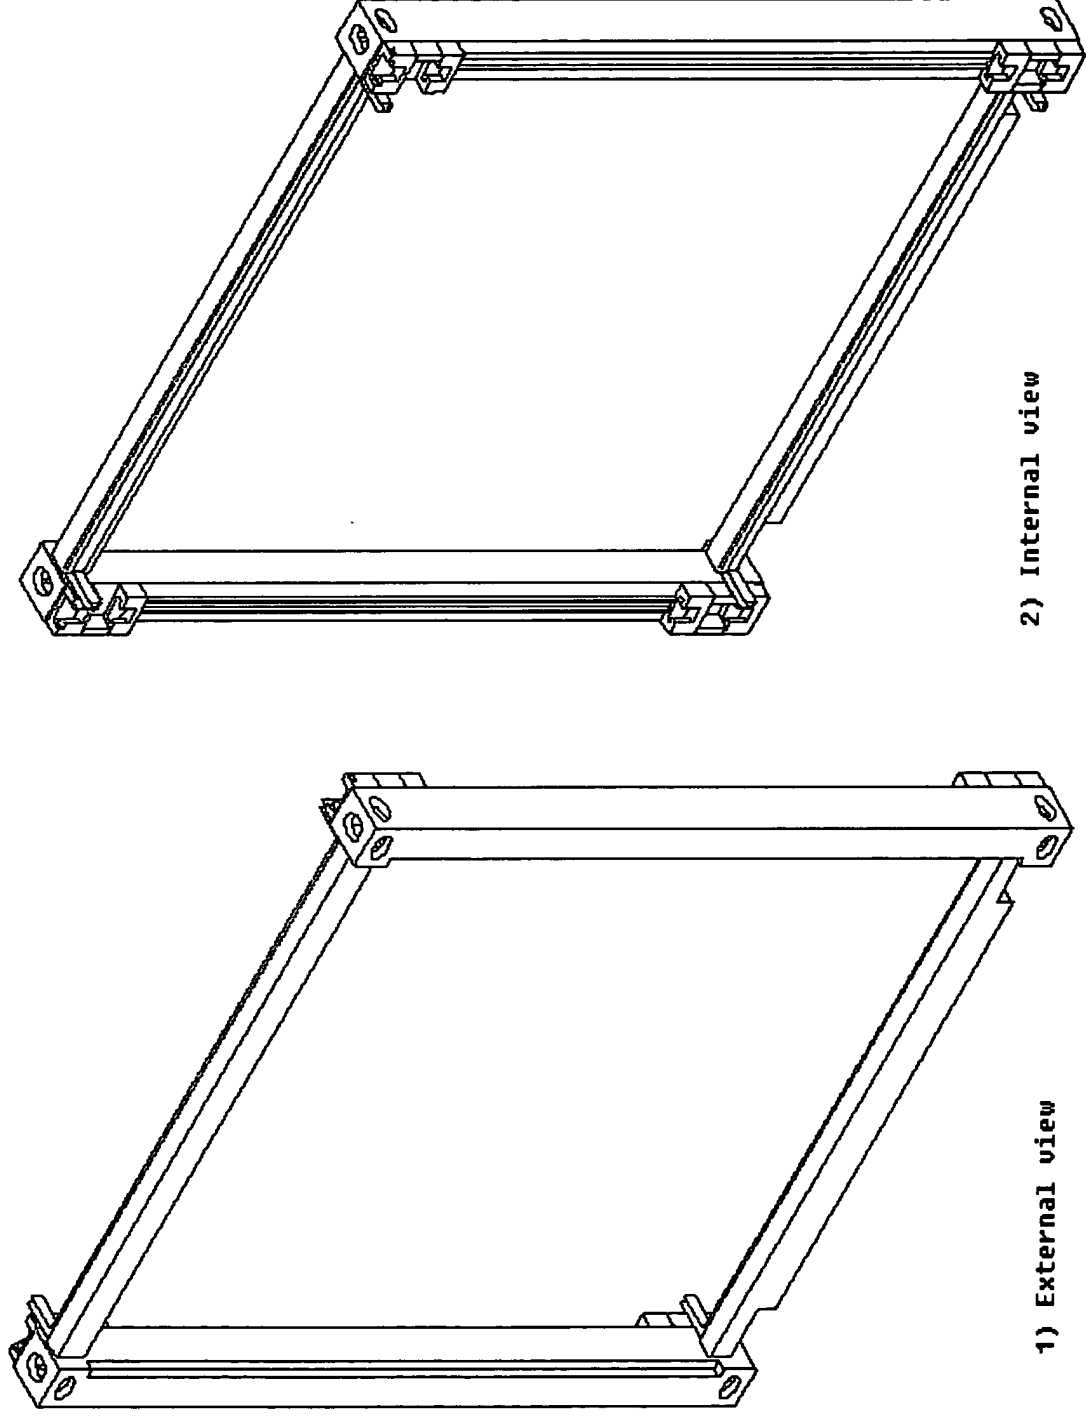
A: Isometric views of a right frame (40 foot collapsible cargo container)
